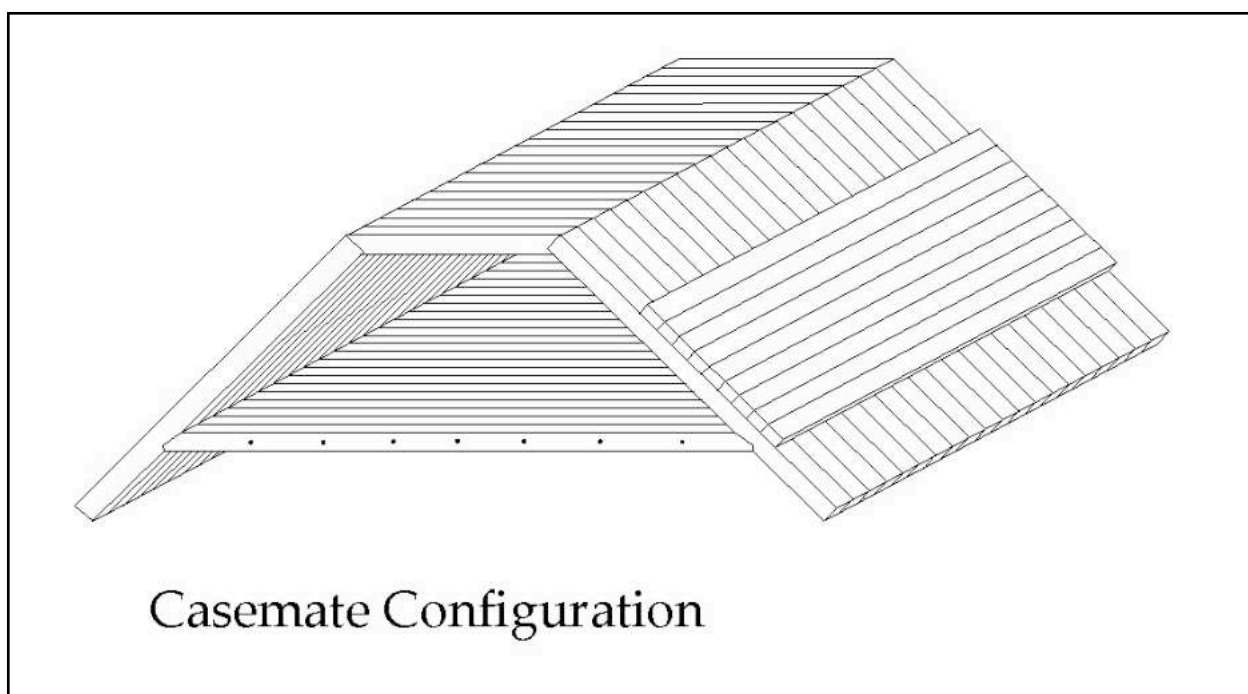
Casemate timber construction configuration showing rebates in the pine timbers for deck beams.
